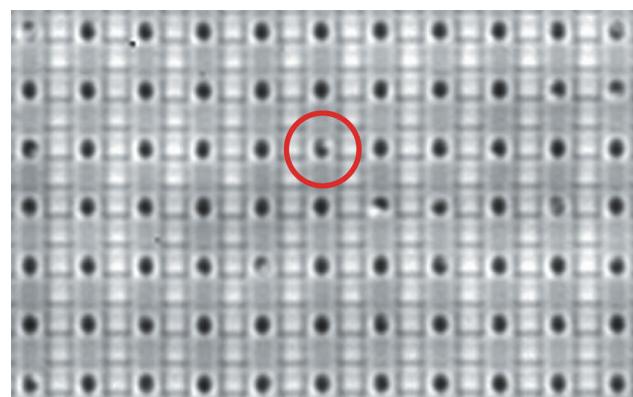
This circled area in this flip-chip image shows a small defect—probably an ILD crack—that only partly obscures the dark solder bump beneath it.
